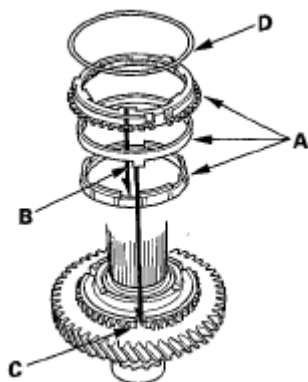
Aligning Synchro Cone Fingers With Grooves In 1st Gear
